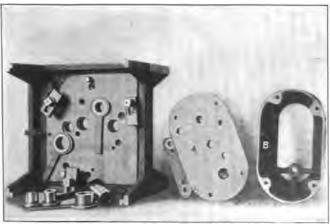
Drill Jig Used for Drilling Work shown to the Right
